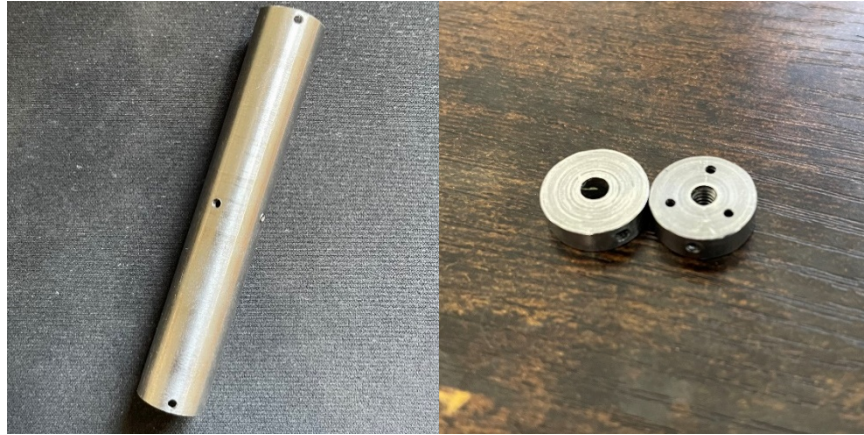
Main body and machined end caps. The End cap on the left is unthreaded, and the end cap on the right has center thread for the center assembly and wire holes for the LVDT sensor.
